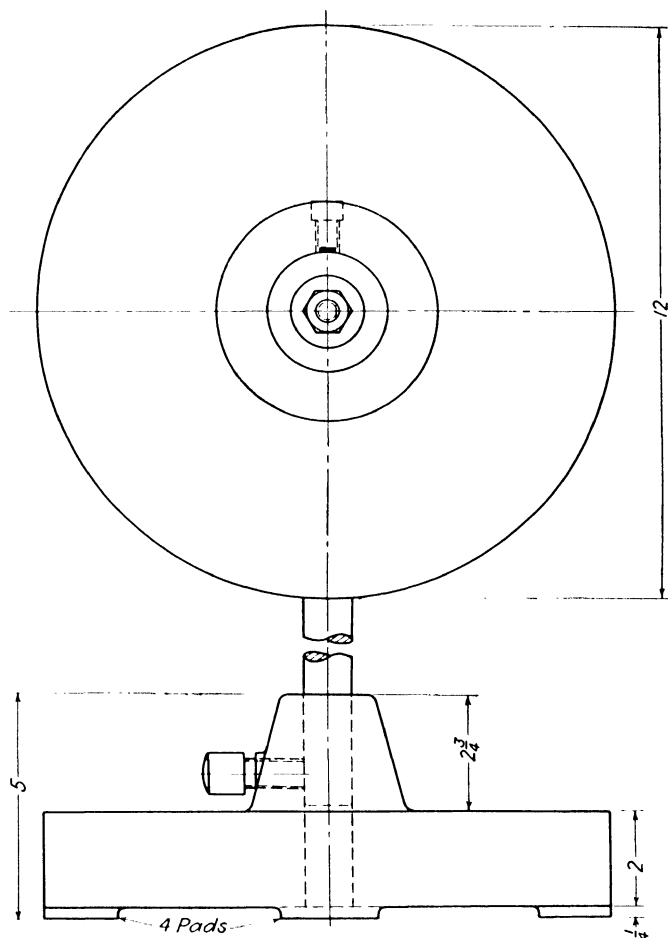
B.—A right-hand projection of the front view of Fig. 332A.
